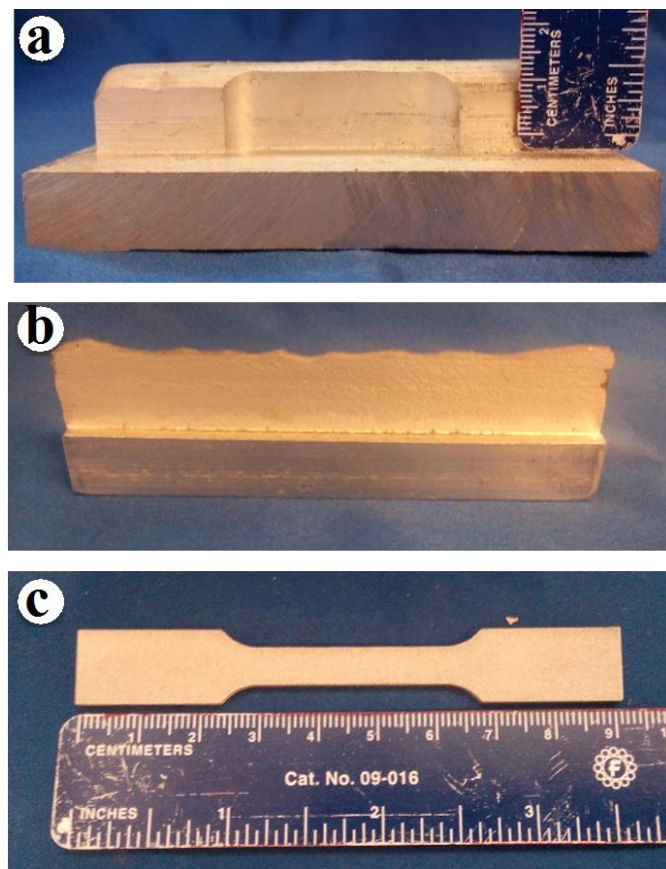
(a) Block deposit milled to dog bone shape as per ASTM E8 standard, (b) Single wall deposit milled on both sides, and (c) Final tensile test sample.
